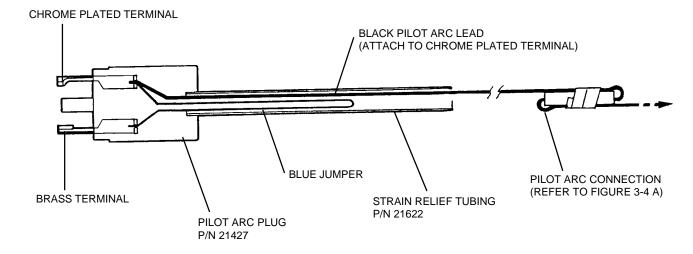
Assembling Pilot Arc Connection and Strip Insulator
